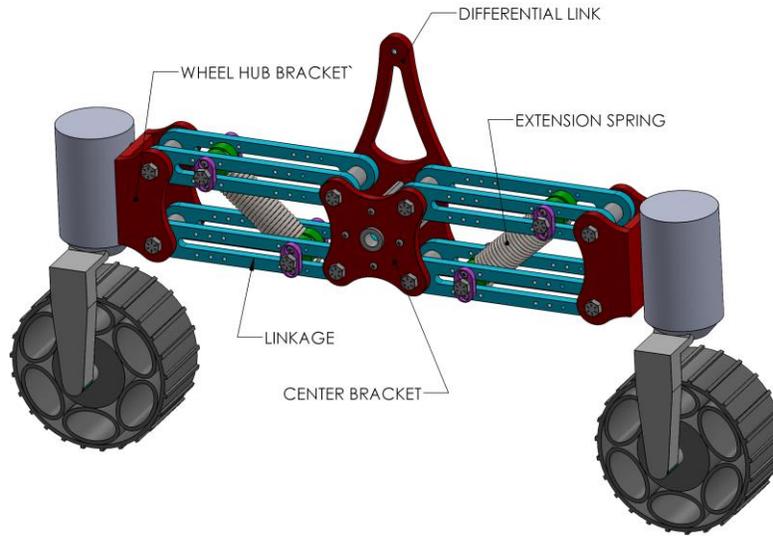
Labeled isometric CAD assembly of the suspension subsystem.
